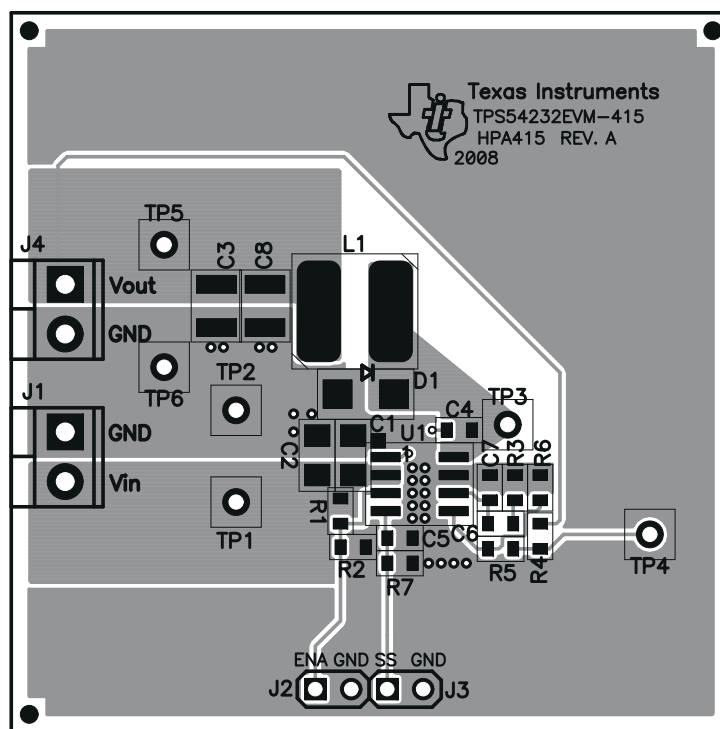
TPS54232EVM-415 Top-Side Assembly
